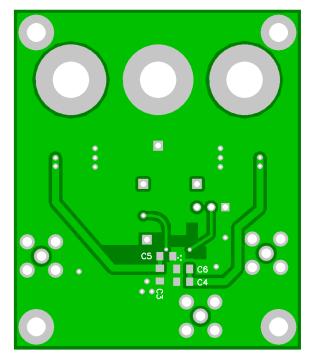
THS3110 EVM Board Layout (Bottom Layer)
